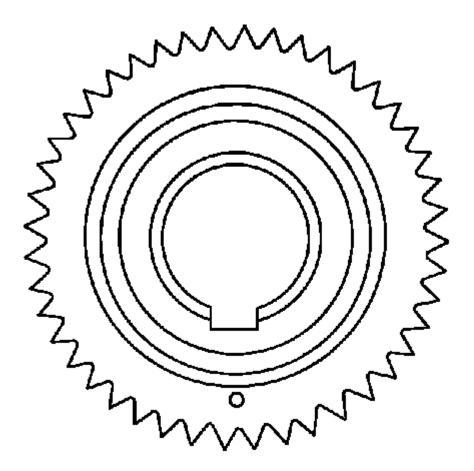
View Of Balance Shaft Driven Gear Timing Mark Courtesy of GENERAL MOTORS CORP.
